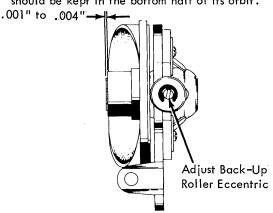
Shift Cam Back-Up Roller Adjustment
